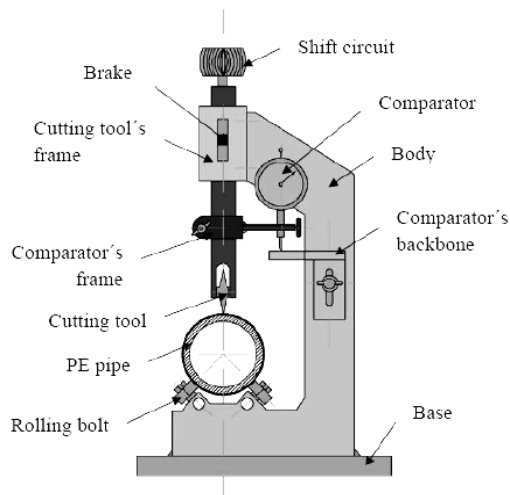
Scheme of device for cutting of an initial axial notch [8,9]
